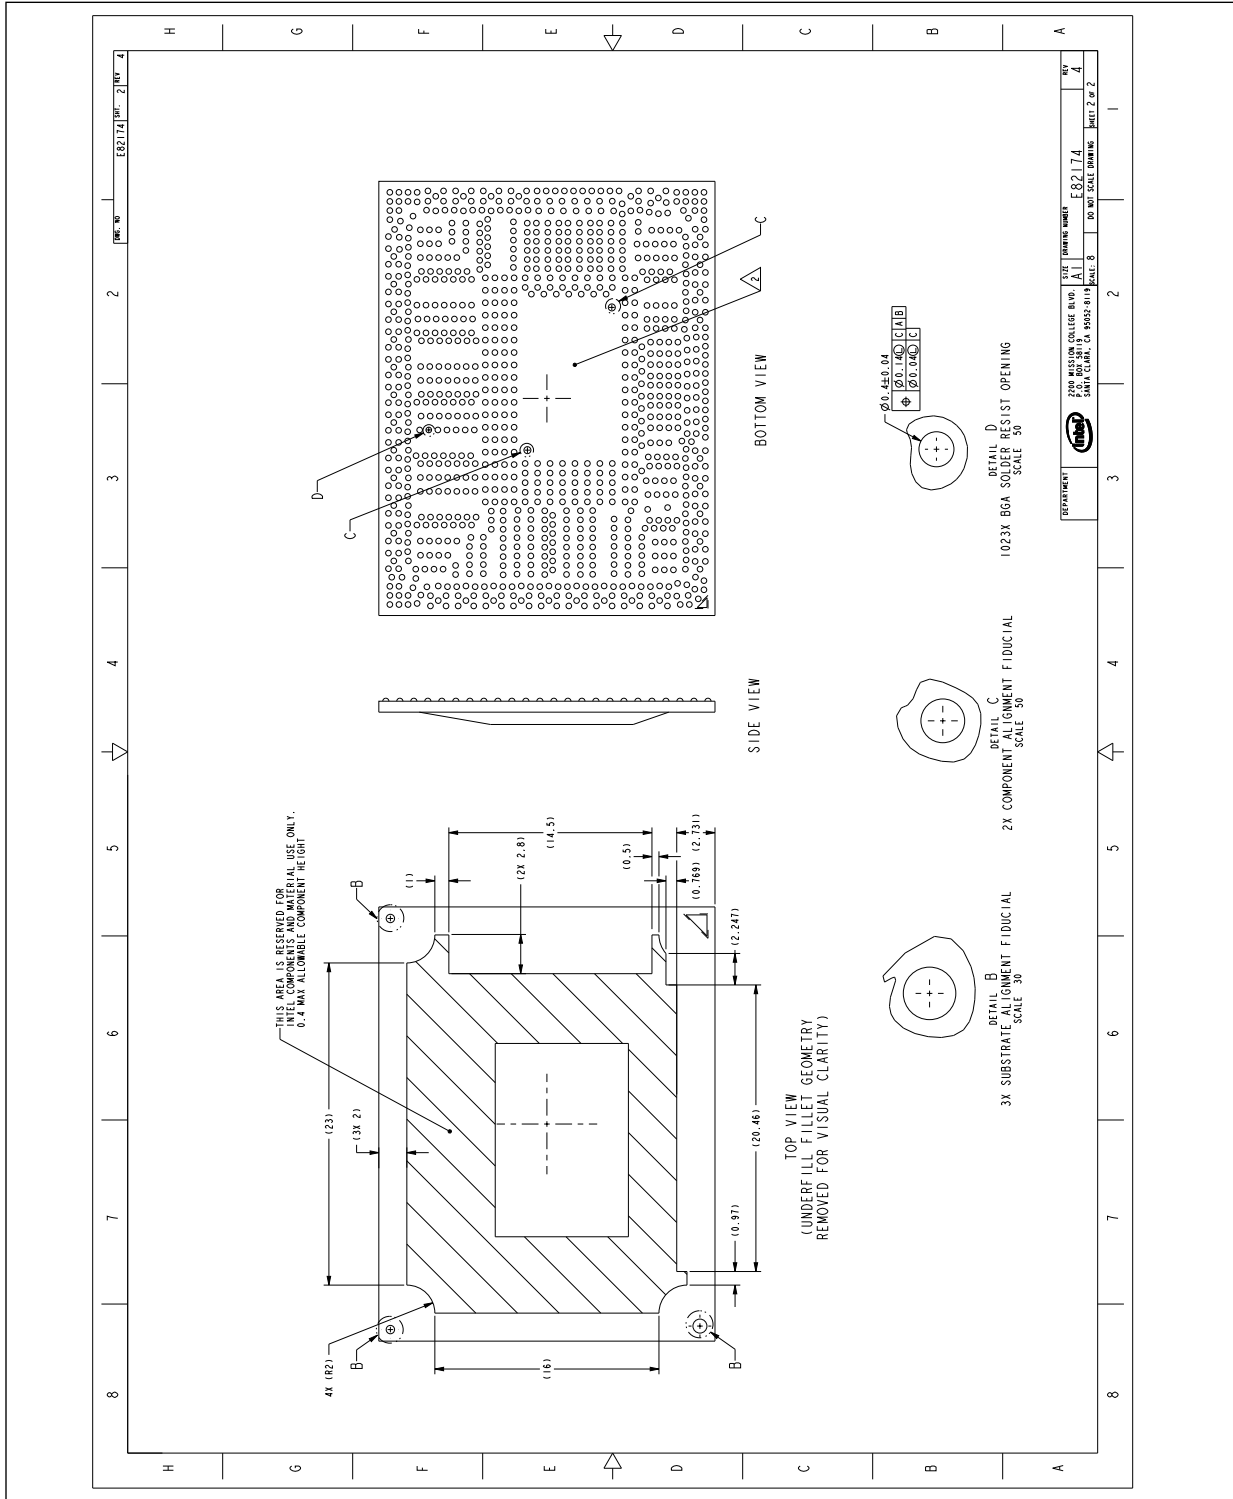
Processor BGA1023 2C (GT1) Mechanical Package (Sheet 2 of 2)
